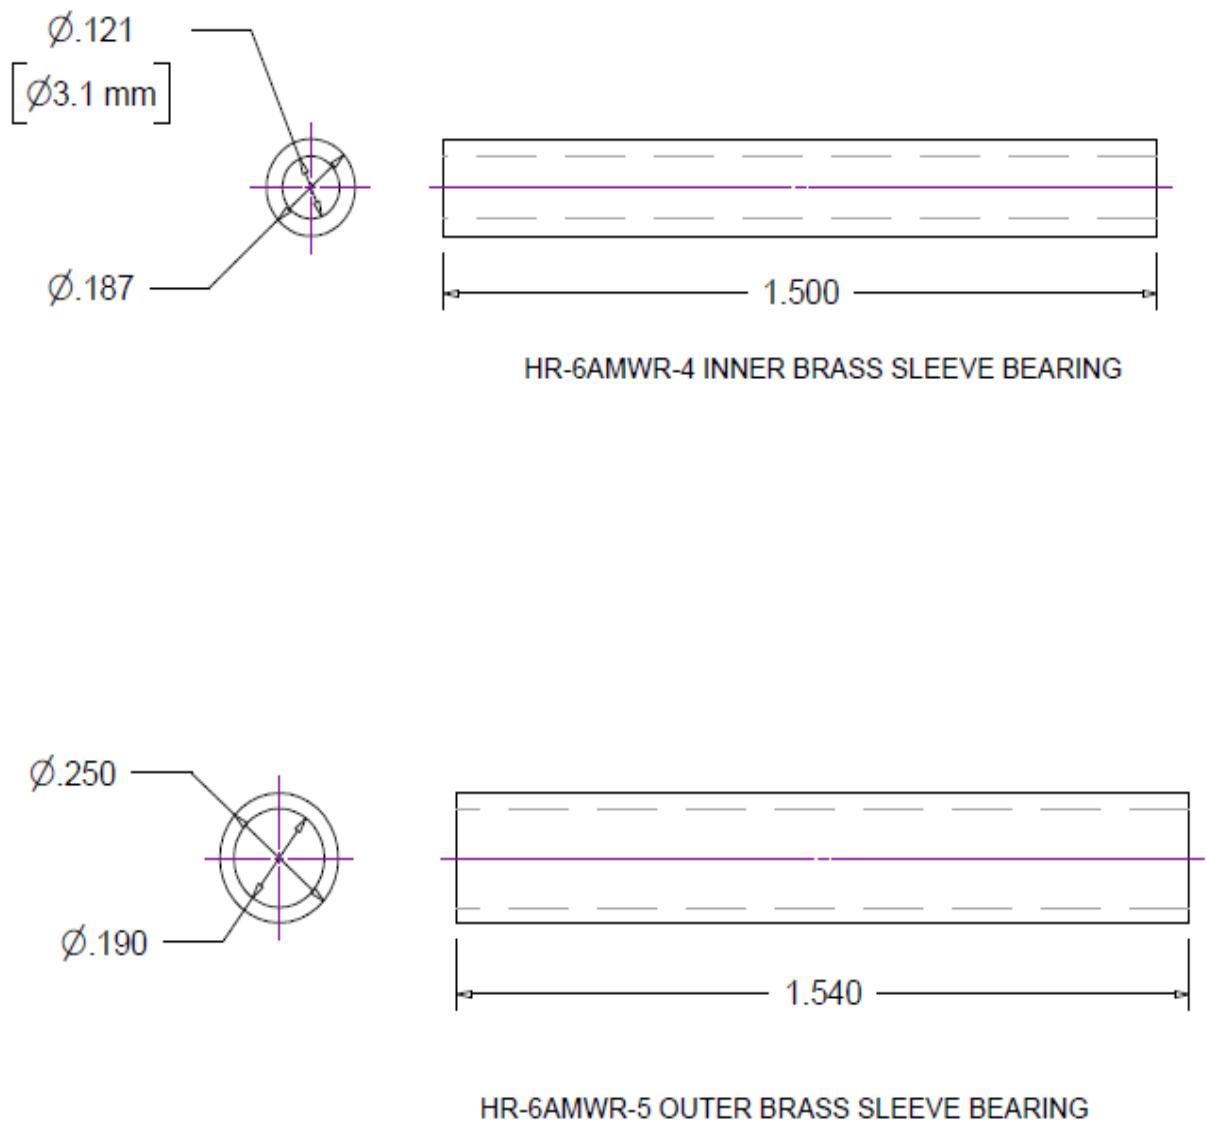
Dimensions of Brass Sleeve & Bearing: [9].
